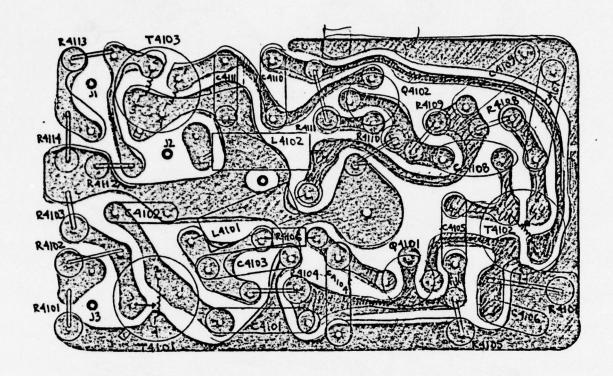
P.C. BOARD LAYOUT FOR THE A4100A RECEIVER FIRST AND SECOND IF AMPLIFIERS ASSEMBLY
